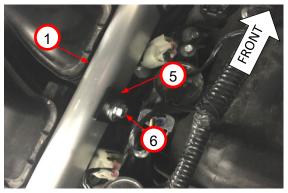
Fuel rail (1), fuel rail bracket (5), bracket bolt (6). NOTE: Passenger side shown; driver side similar.
